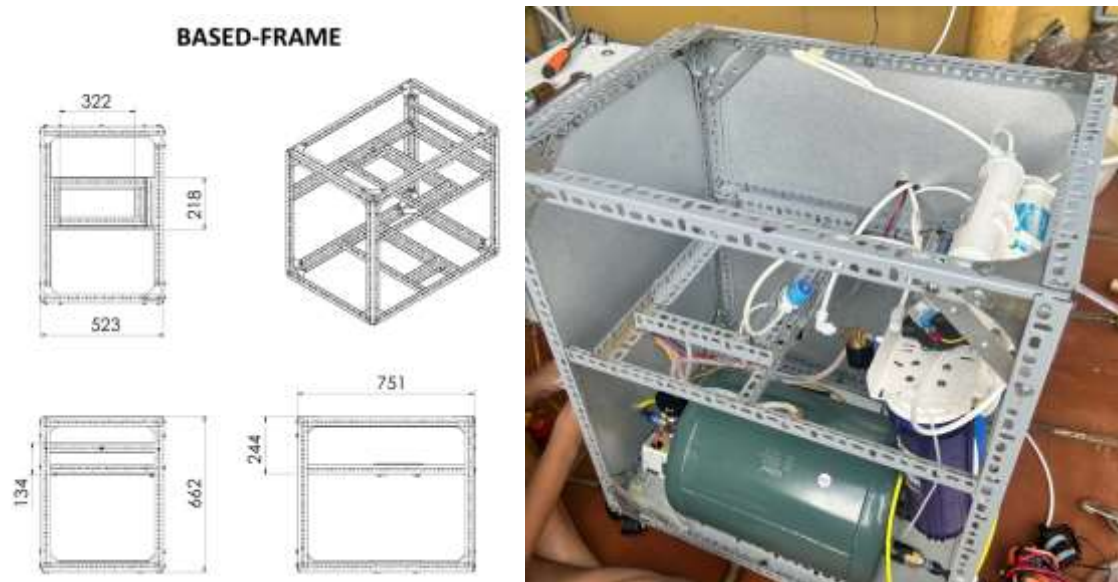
Detail drawing (left) and actual assembly (right) of the based frame
